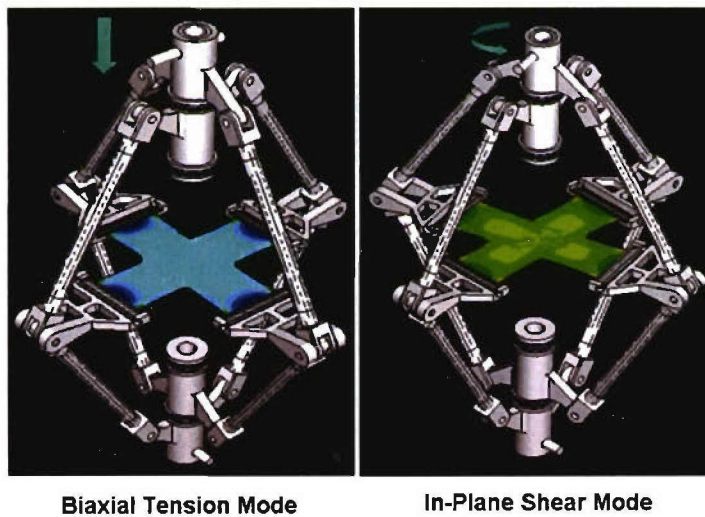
Combined Multi-Axial and Shear Test Fixture (U.S. Patent No. 6,860,156)
